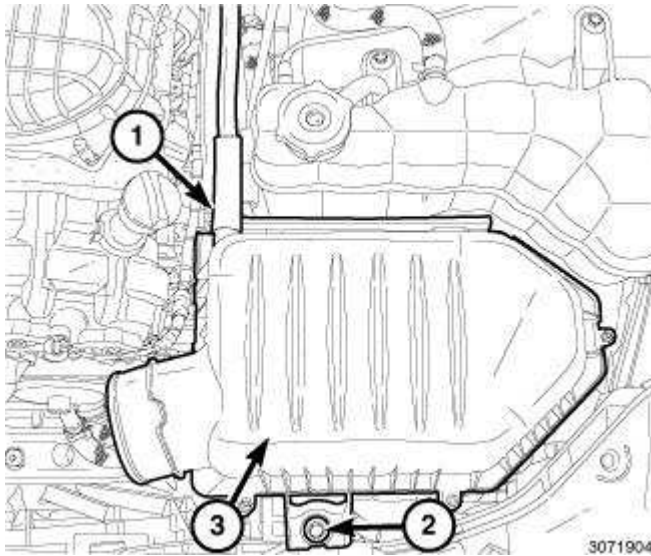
Fresh Air Makeup Hose, Air Cleaner Housing & Bolt
